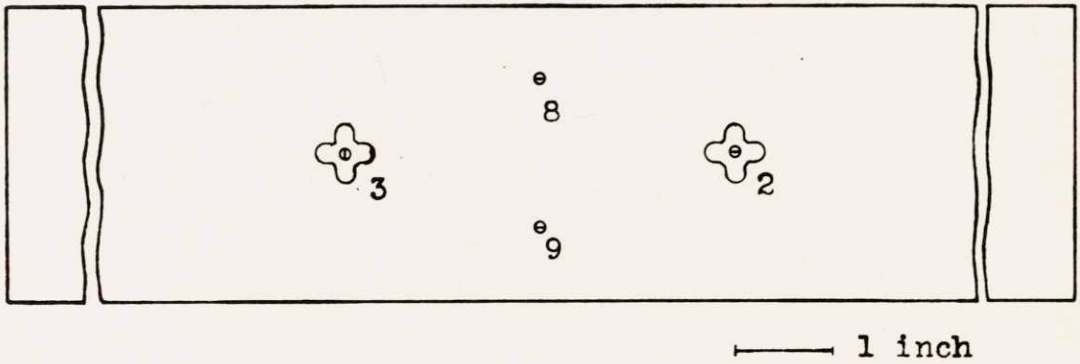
Recess Number 2 and 3 on the Specimen IV Machined into Rosettes
